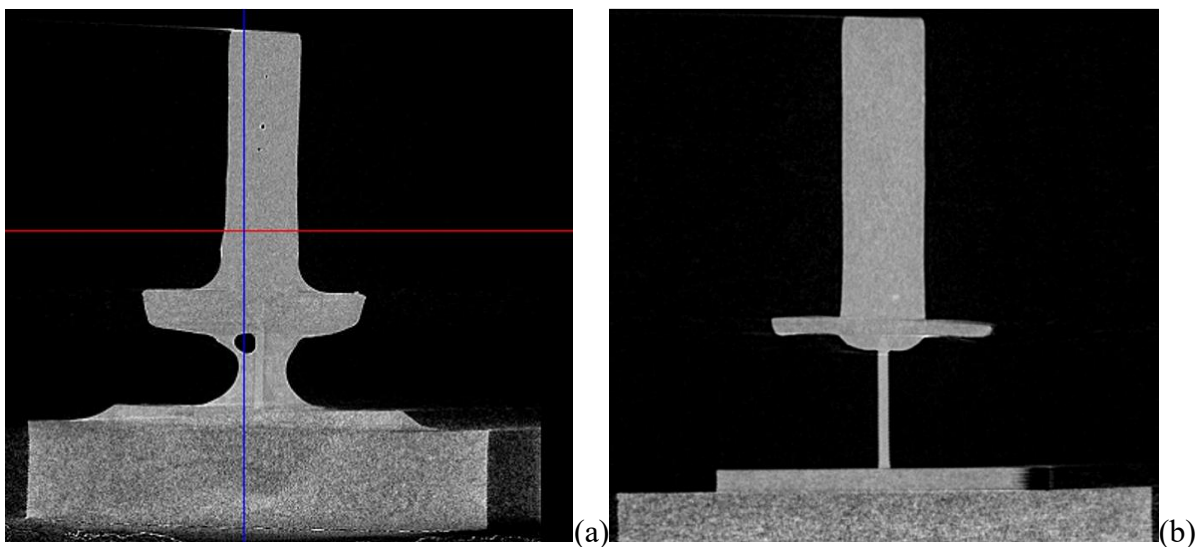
(a) One of the badly printed sensors presented in [166] and (b) improved version with different printing settings.
